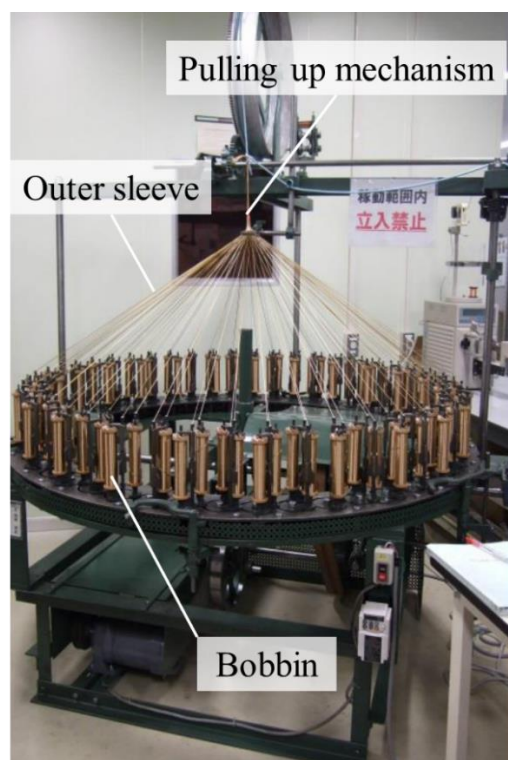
Braiding machine fabricating thin McKibben muscles.
